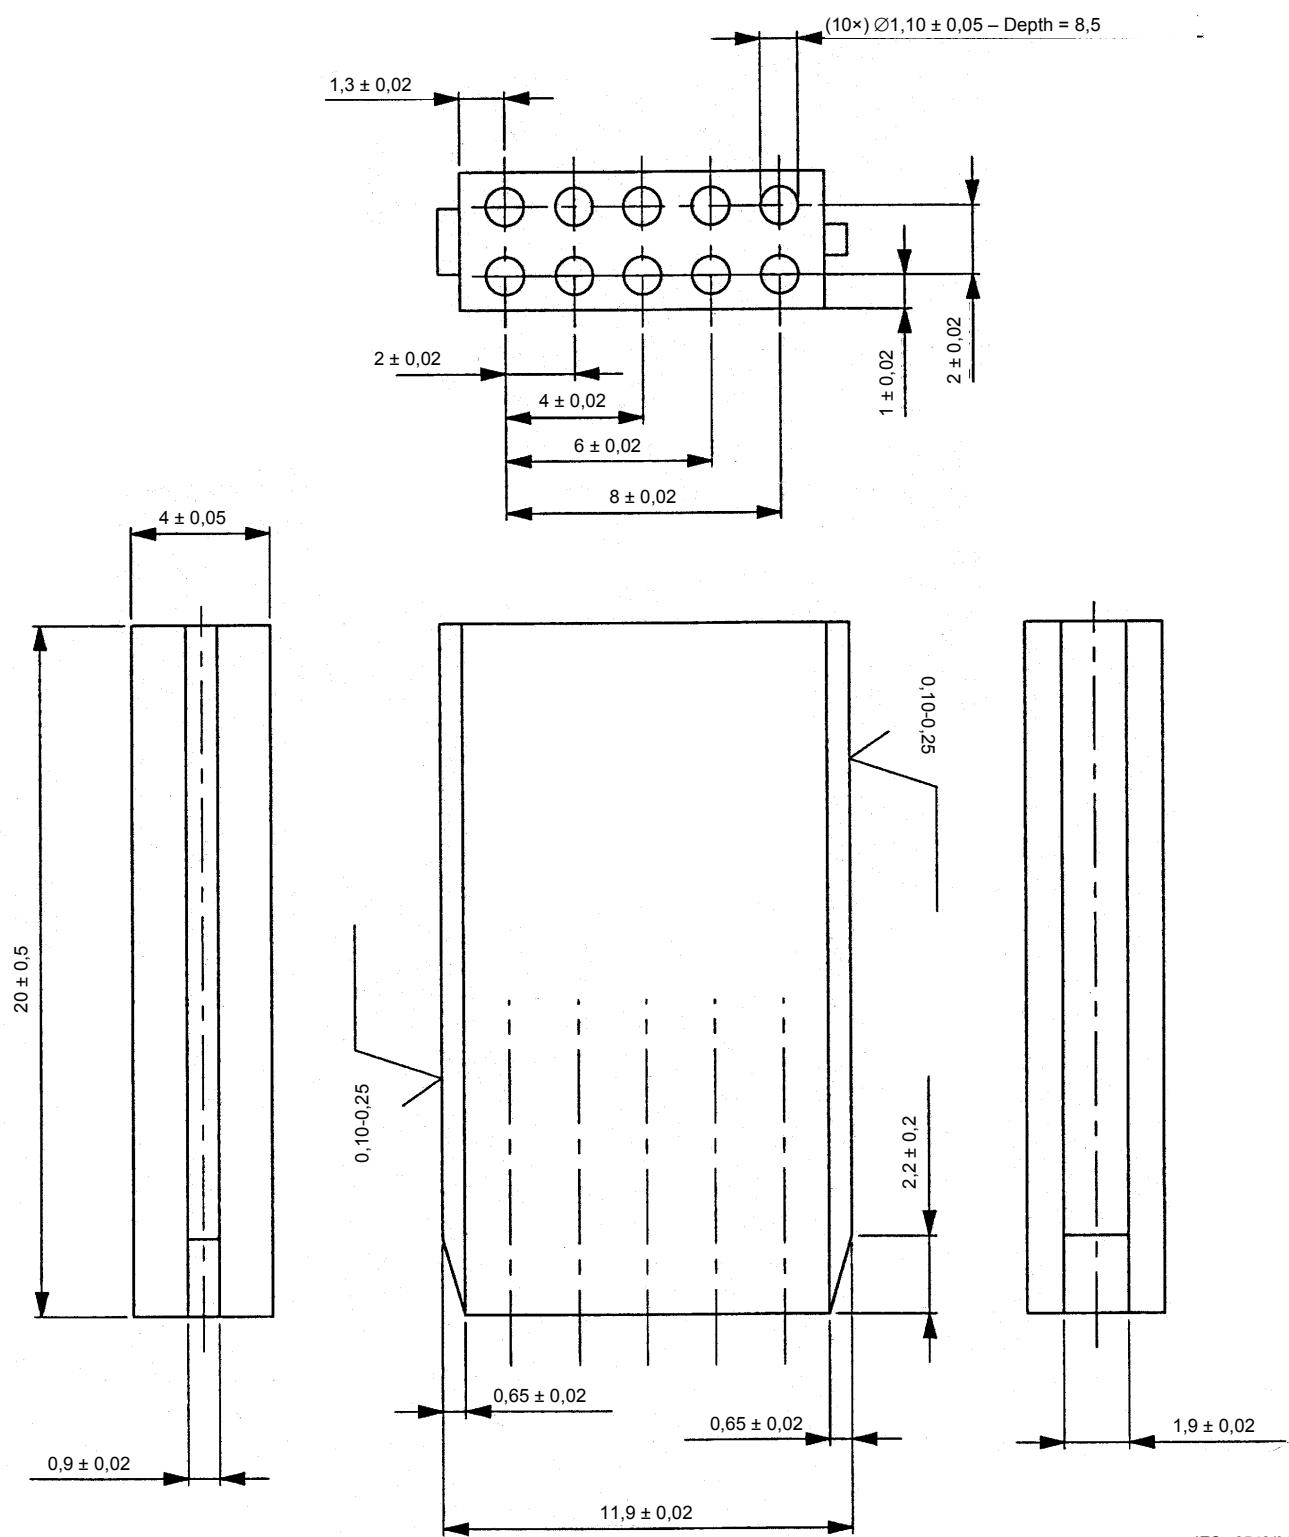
Sizing gauge for mating part of fixed connector shielding
